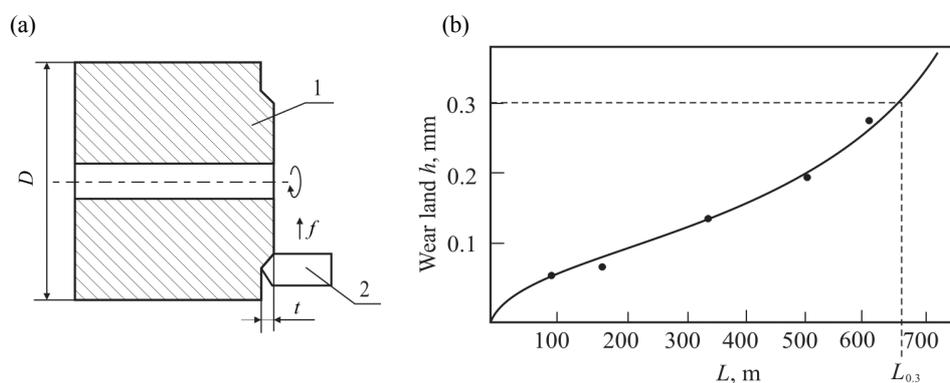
The scheme of adhesive wear testing: (a) scheme of testing (1 – mild steel to be turned, 2 – specimen); (b) kinetics of wear ($L_{0.3}$ – adhesive wear resistance, L – cutting path).
